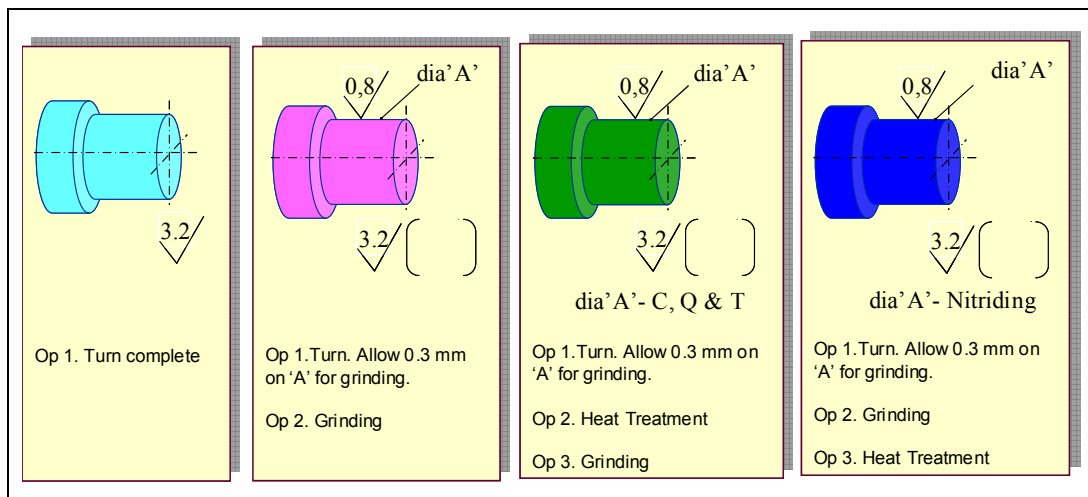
Four simple and similar drawings with no dimensions and no tolerances, where it was still possible to develop correct process plans by only considering, and combining the surface finish, and the heat treatments drawing instructions
